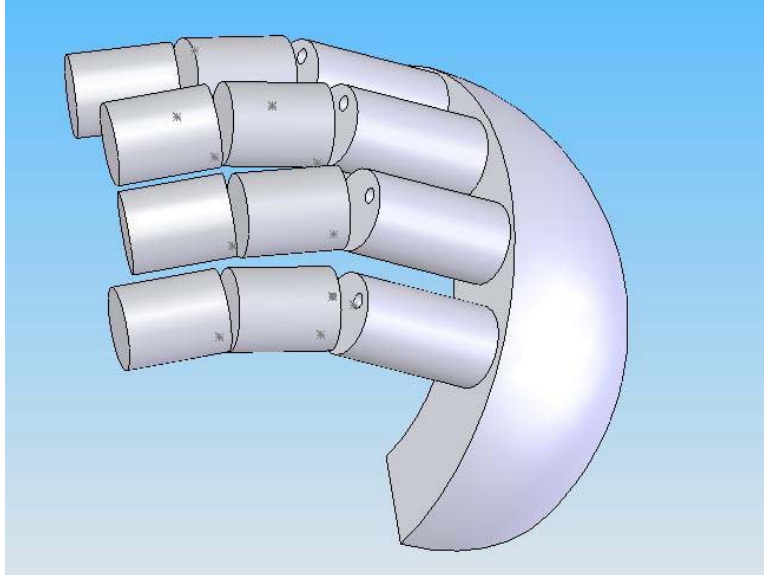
Solidworks design of the mechanical hand, in this design there lacks the motors that will be controlling each finger through a worm gear/spring system.
